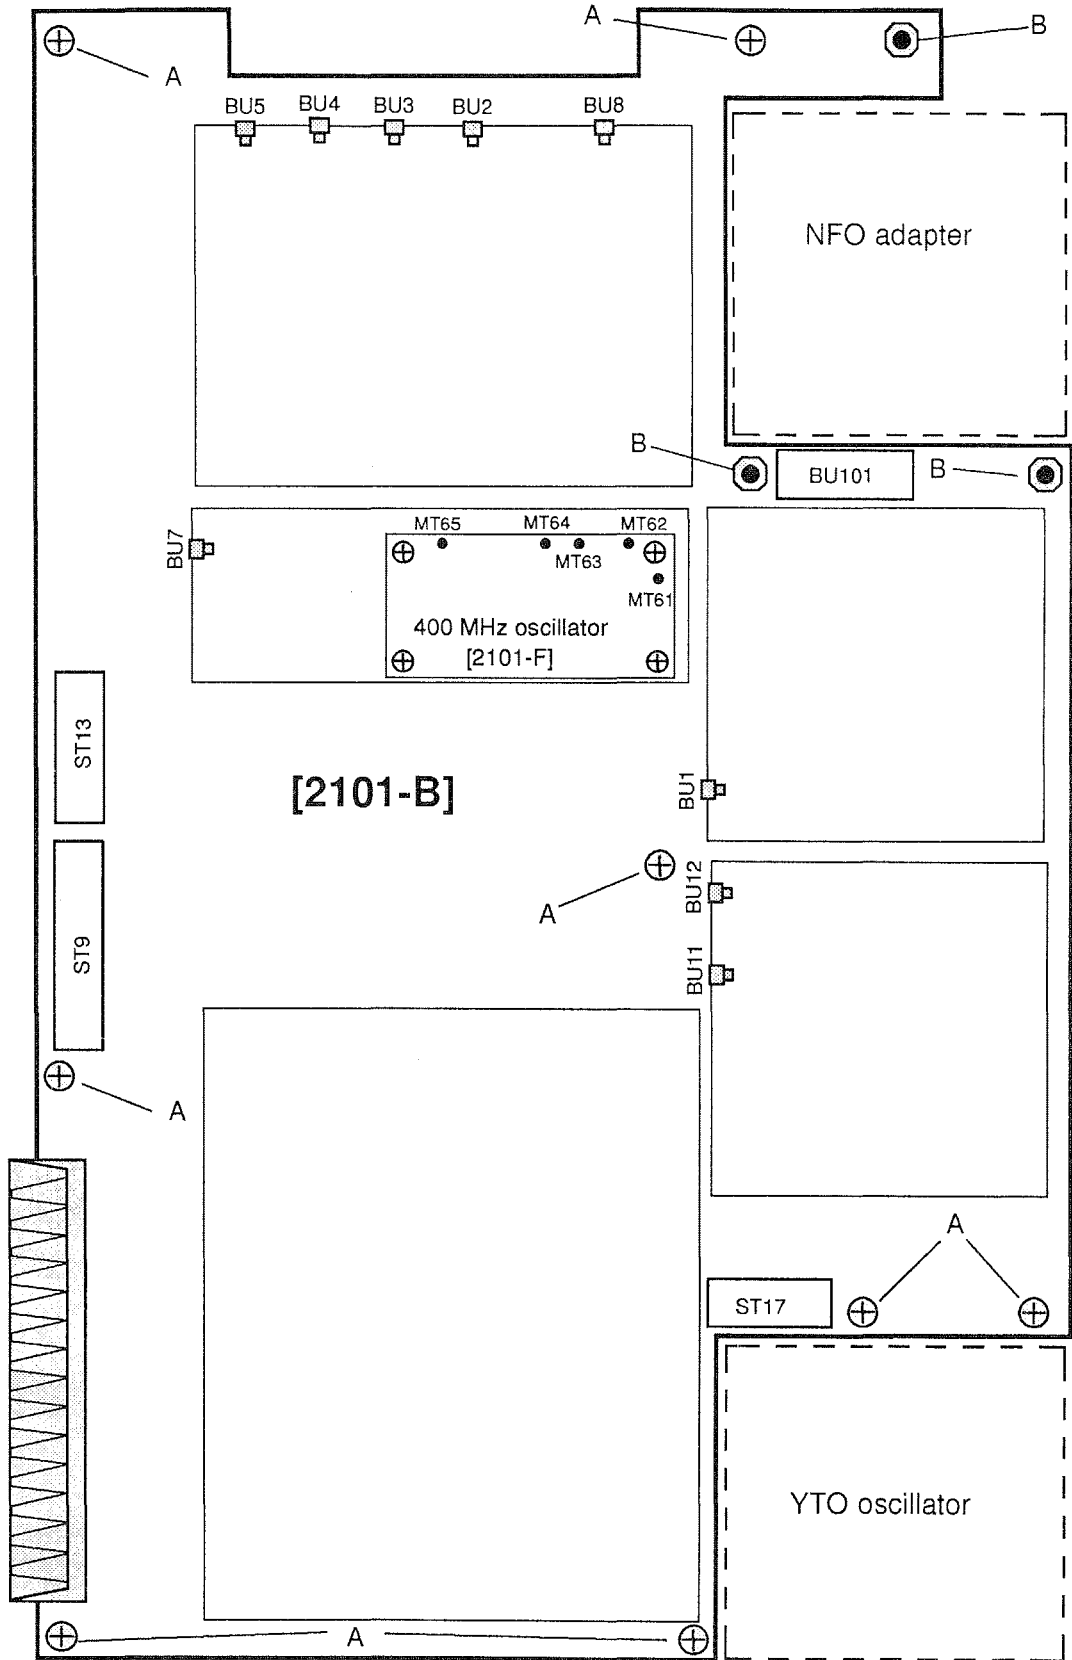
Positions of fixing screws, plugs and sockets on circuit board [2101-B]
